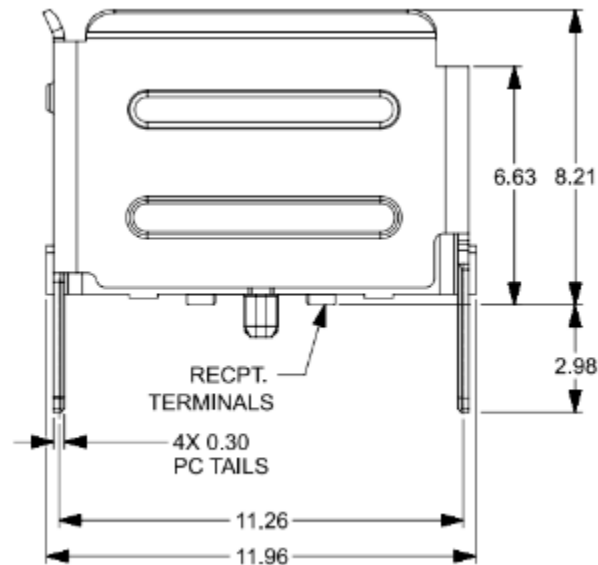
72-Pin Profile View of Fixed-Side Connector Cage
